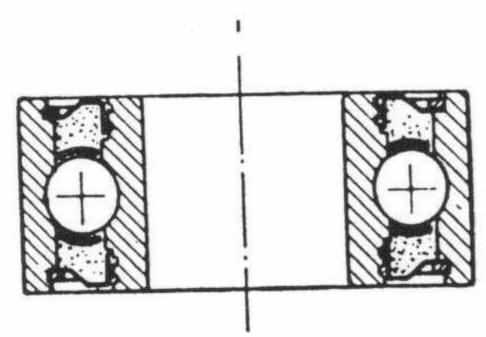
Prelubricated Ball Bearings Labyrinth Seals
